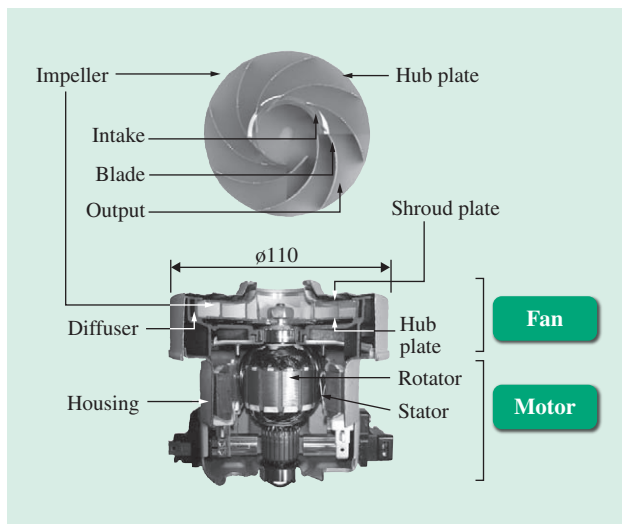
Fan Motor Cross-section and Impeller. Light weight is achieved by changing the housing material from steel plate to aluminum.
